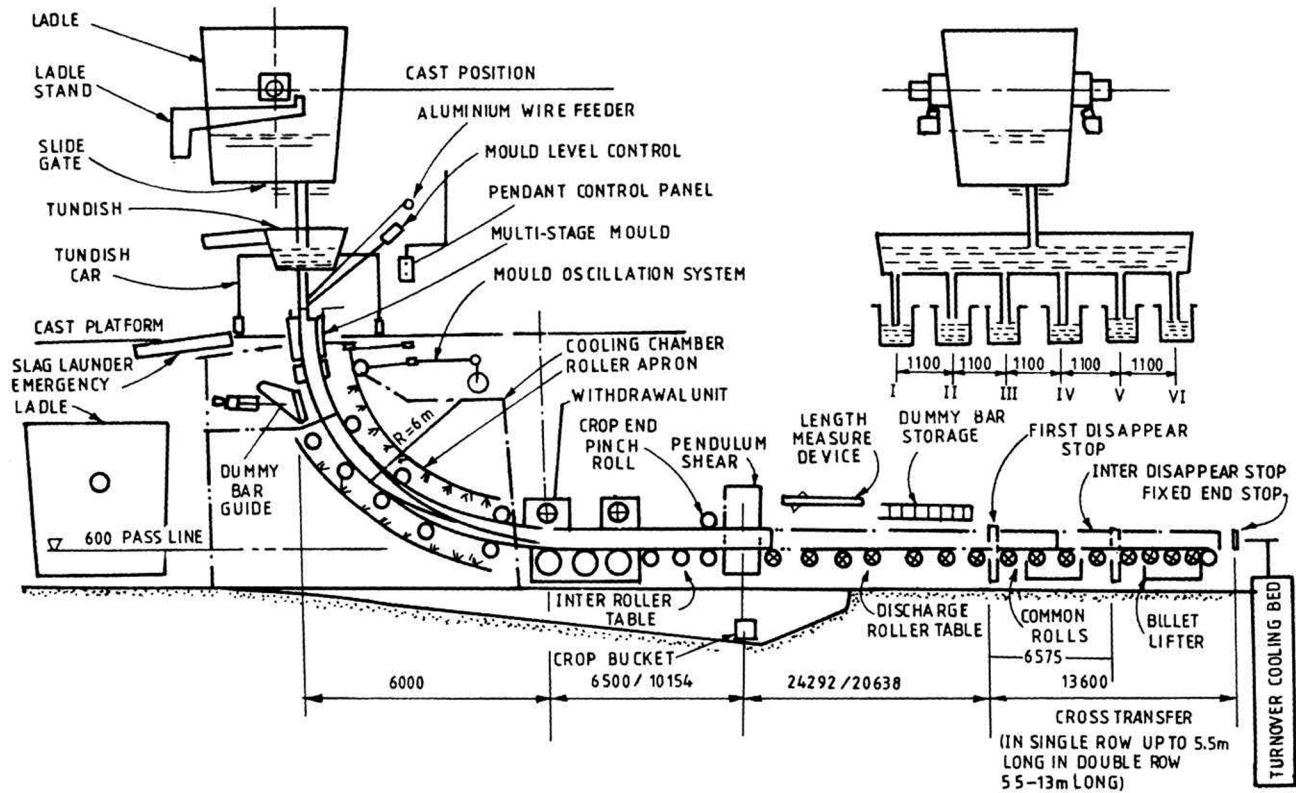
Schematic view of curved mold (S-type) continuous casting machine as adopted at Tata Steel<sup>42</sup>.
